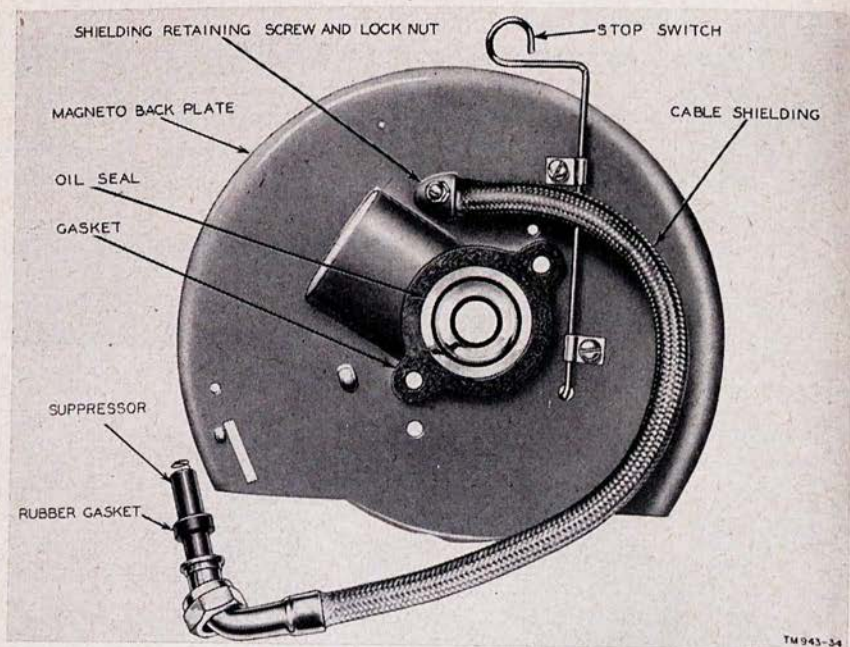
Magneto backplate, stop switch, and spark plug cable.
